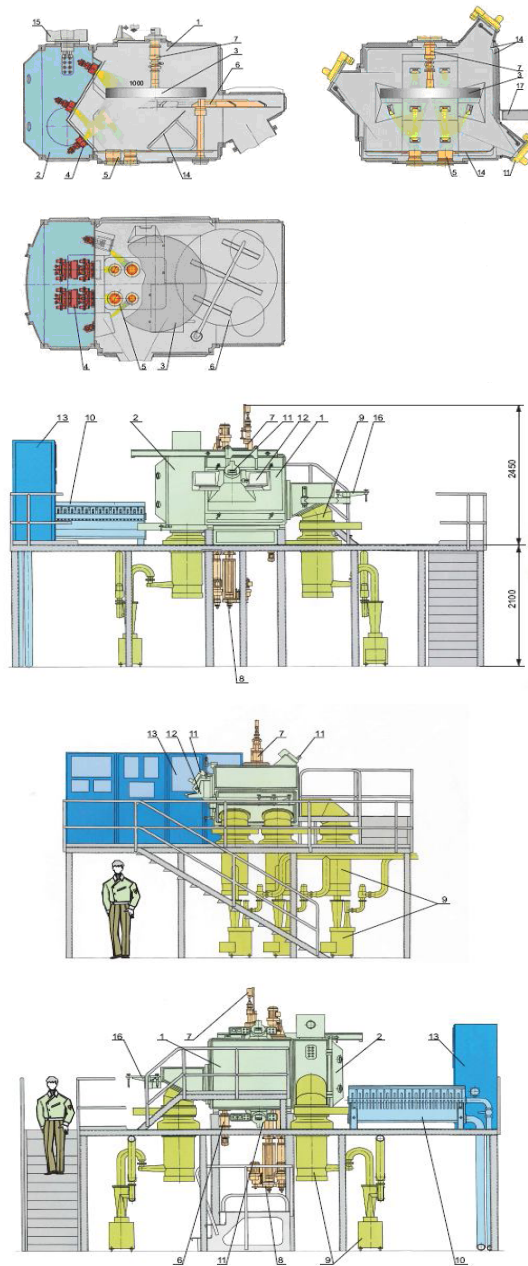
Schematic diagram of the L-5 equipment: 1 — working chamber; 2 — electron gun chamber; 3 — product (base); 4 — electron guns; 5 — melting crucible block; 6 — curtain; 7 — lifting and rotation mechanism of the product; 8 — feeder of ingots; 9 — vacuum system; 10 — cooling system; 11 — visual inspection windows; 12 — control desk; 13 — control box; 14 — shielding; 15 — high voltage input; 16 — manipulator; 17 — plane of routine maintenance.
